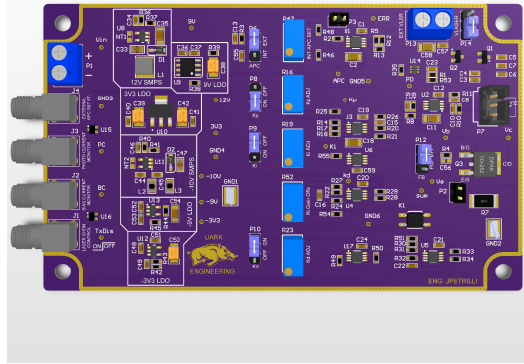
3D rendered top view of the PCBA using Altium Designer 2017.
